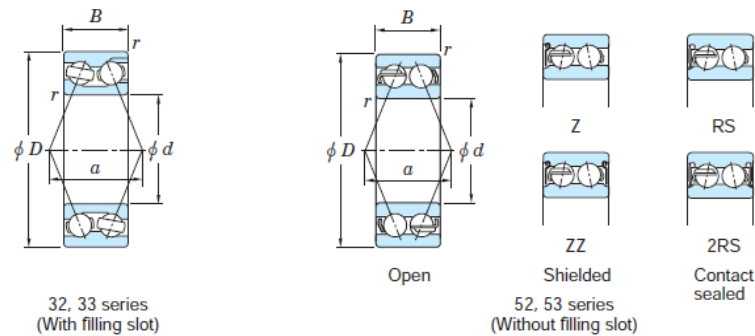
Double row angular contact ball bearing in cars front wheel (KOYO,2023)
